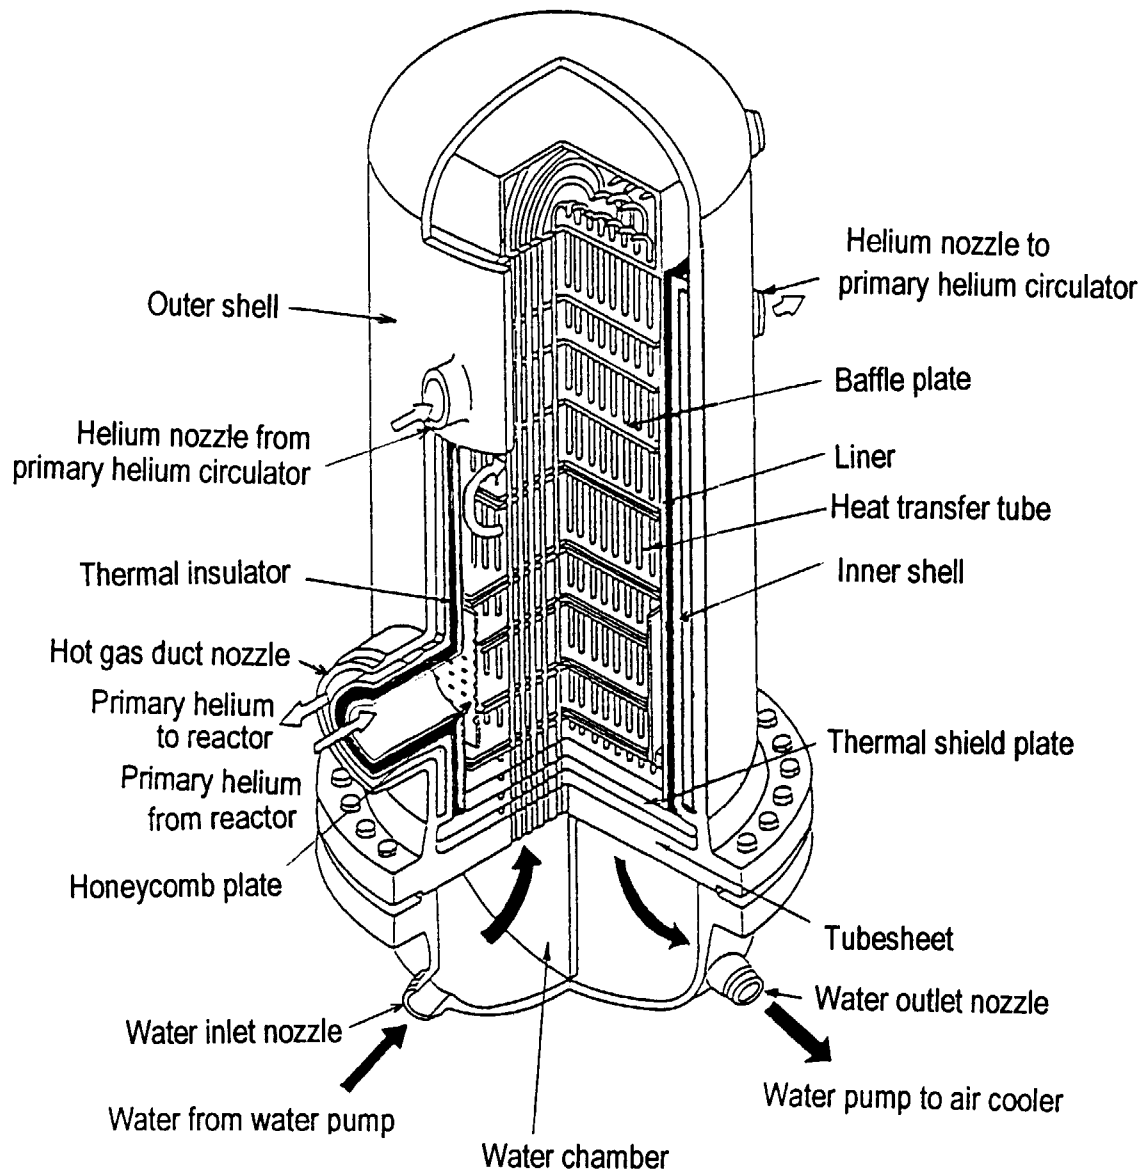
Bird's-eye view of primary pressurized water cooler
